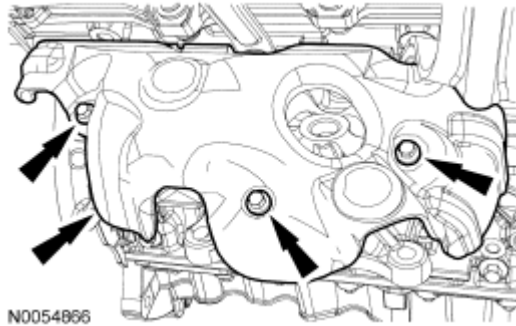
Locating RH Exhaust Manifold Heat Shield & Nuts
